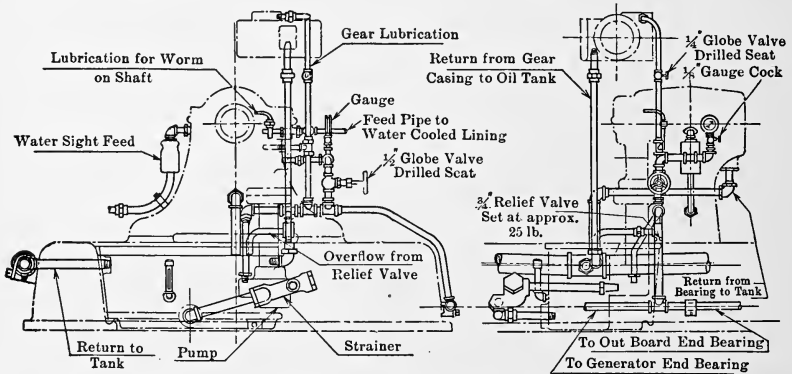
Diagram of Oil Piping for Curtis Horizontal Turbine.
